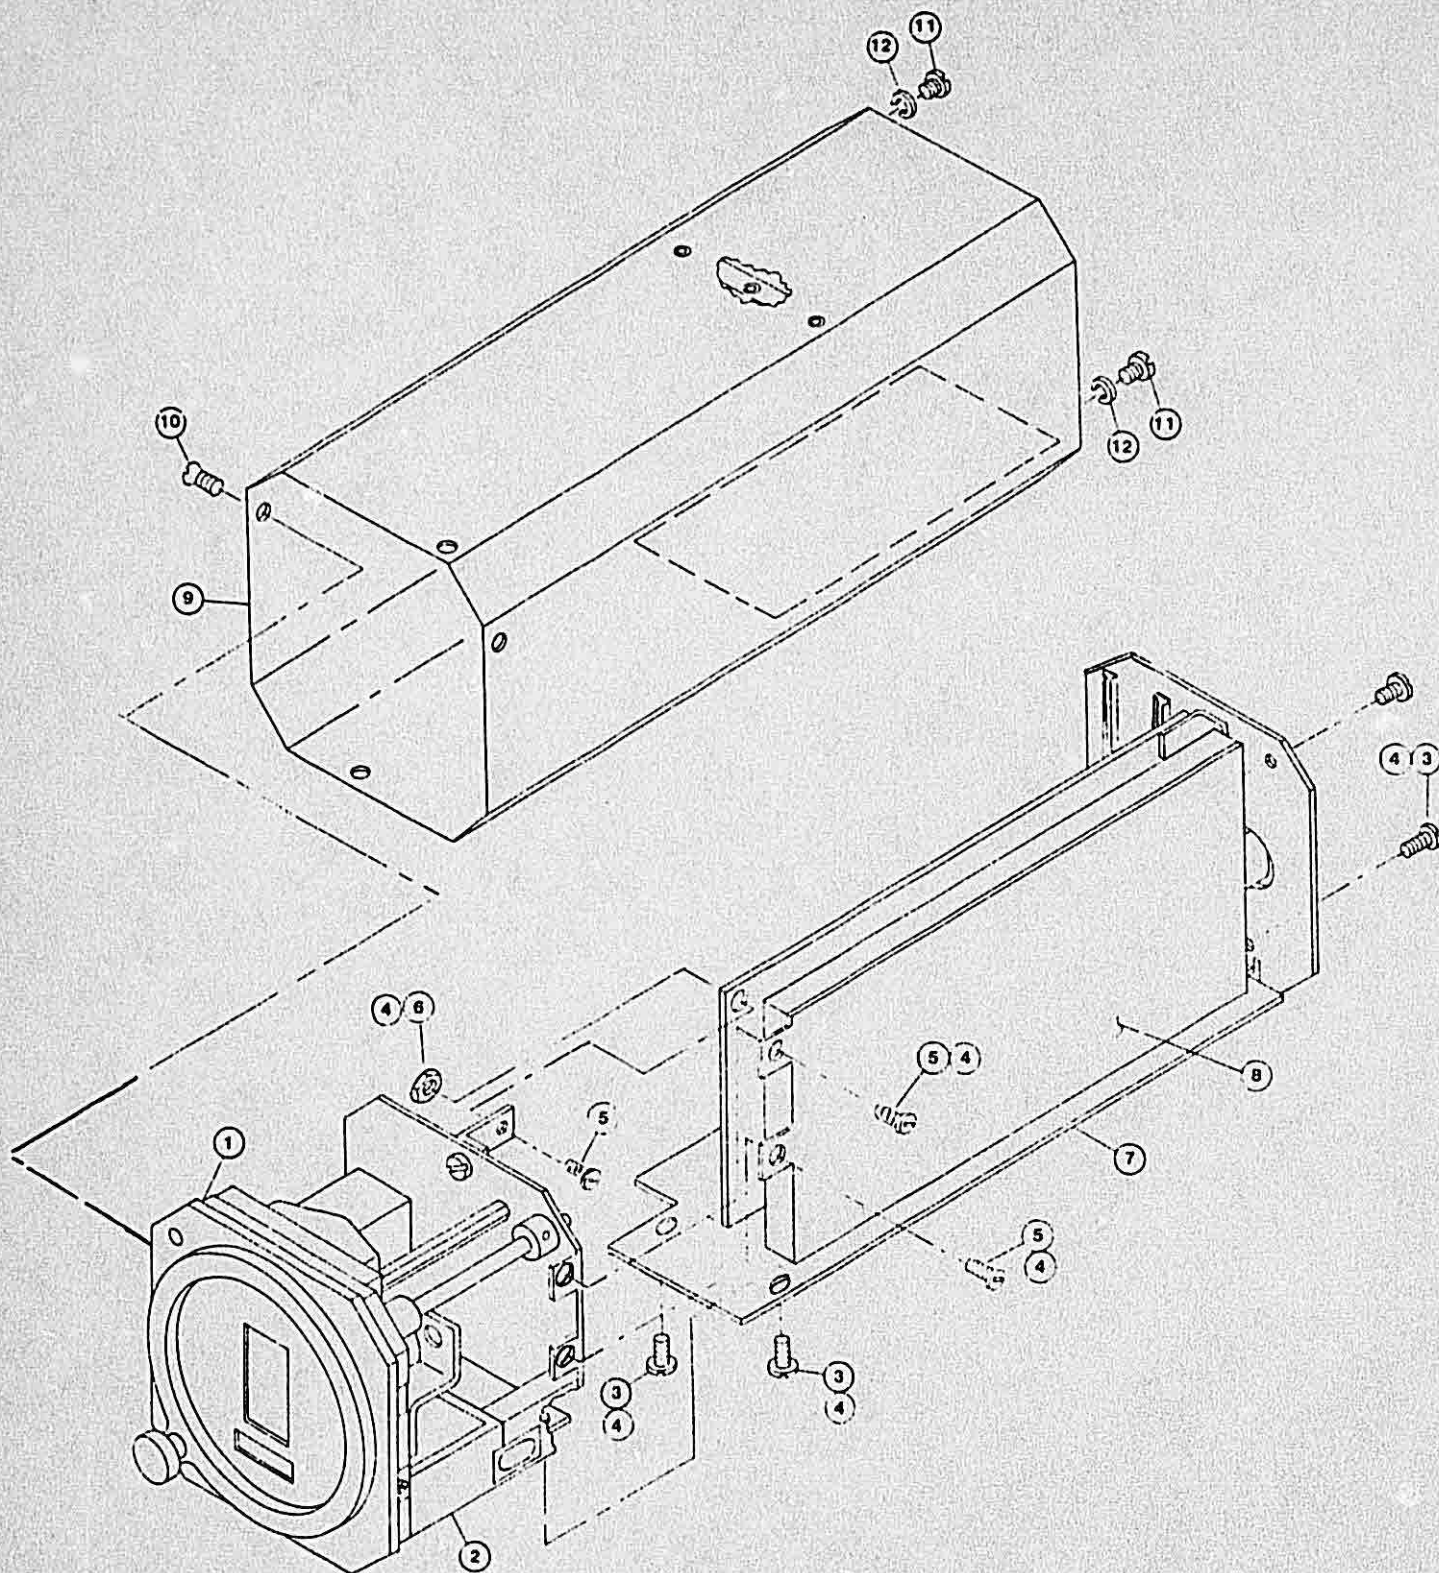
IDME 891 "T" BOARD & TRANSMITTER TO CONTROL HEAD MOUNTING
